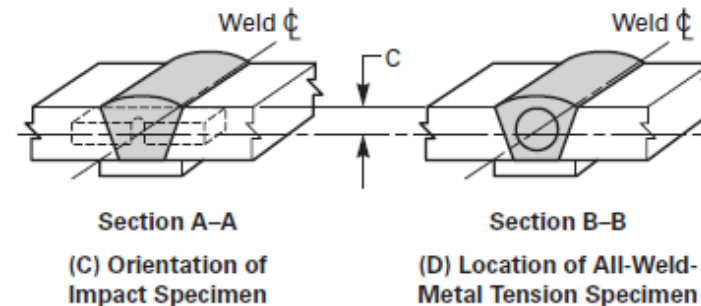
GROOVE WELD TEST ASSEMBLY FOR MECHANICAL PROPERTIES AND SOUNDNESS
